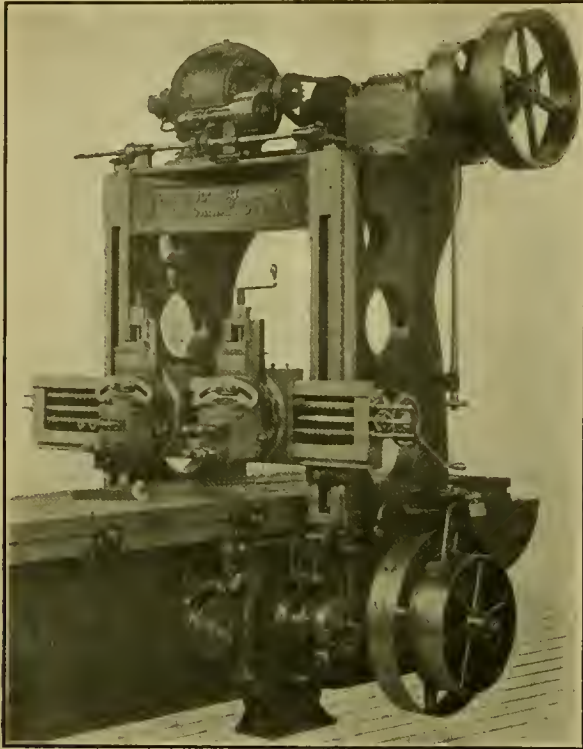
A SPECIAL DESIGN OF FLYWHEEL DRIVE UPON A PLANER, WITH MECHANICAL VARIABLE-SPEED DEVICE; BUILT BY THE CINCINNATI PLANER COMPANY.—NORTHERN ELECTRIC MOTOR.
